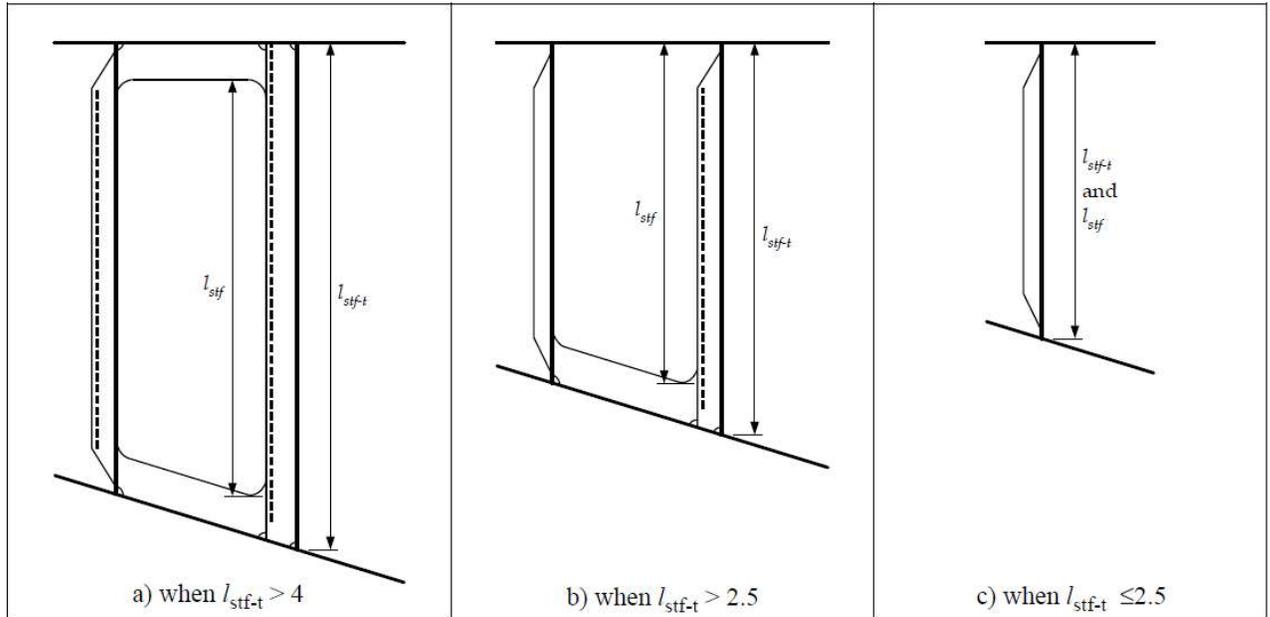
Stiffening of Floors and Girders in the Aft Peak
